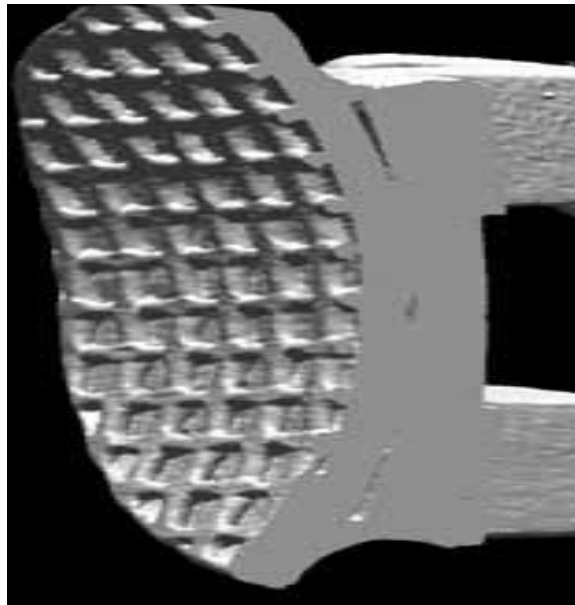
Detail of a 3-D X-ray microtomography image of a bracket manufactured with laser welding. Note the gaps appearing in the base-wing interface, which are due to the lack of continuous joining [9].
